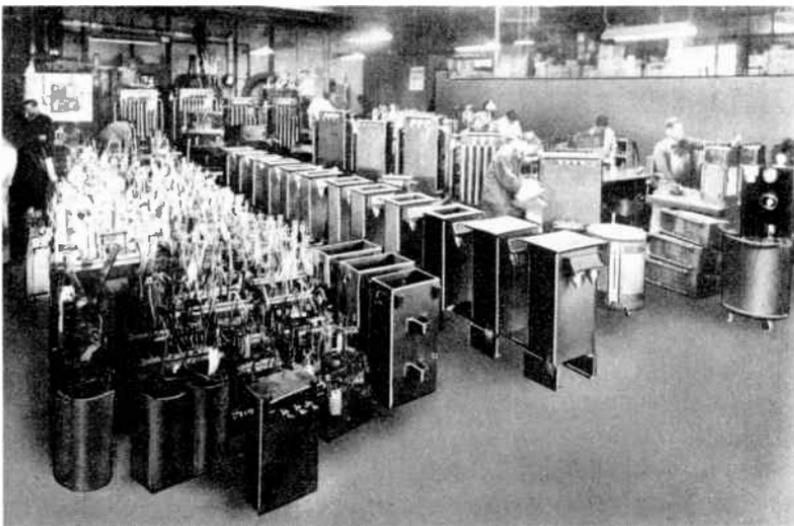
Testing and tank (case) assembly room of a transformer manufacturer. (Courtesy of Eisler Engineering Company.)
